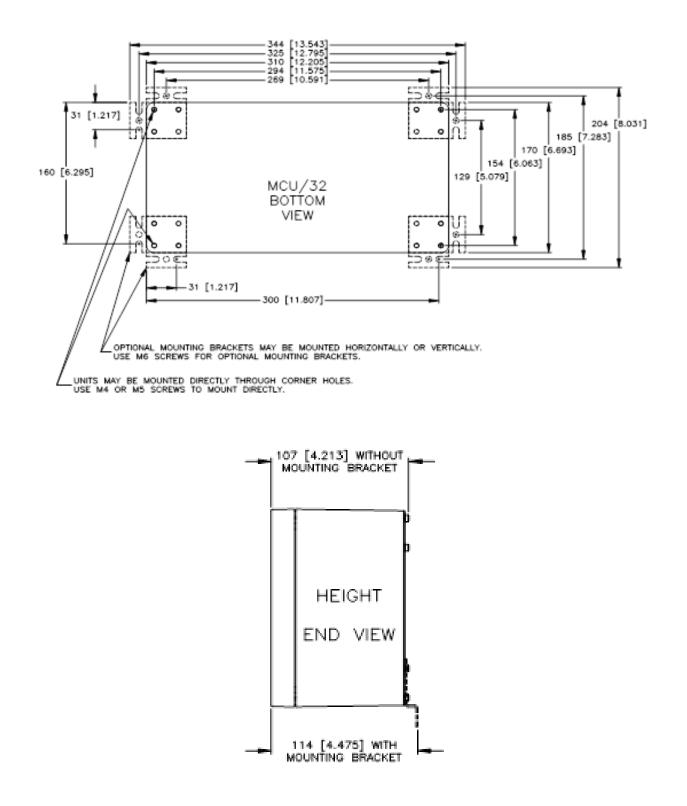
CT24-32 MCU Enclosure Mounting Drilling Drawings
